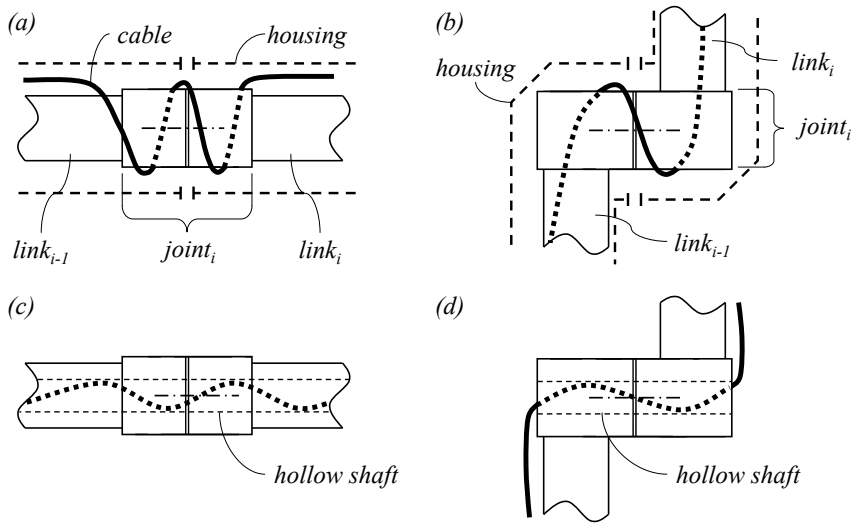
Cable routing for bridging revolute joints: external winding with roll joint (a) and pitch joint (b), internal cable routing through hollow shaft of a roll joint (c) and pitch joint (d)
